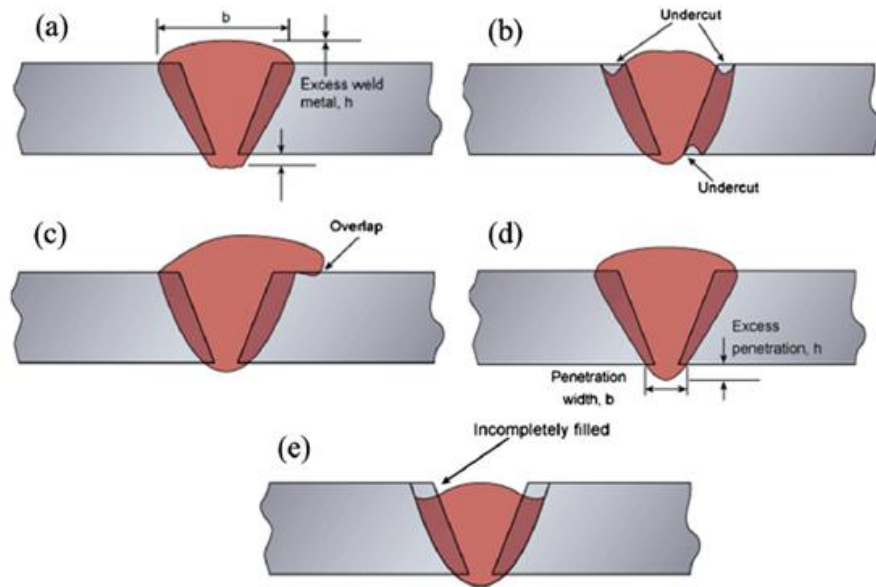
Geometric defects: (a) excess weld metal, (b) undercut, (c) overlap, (d) excessive penetration, (e) incompletely filled groove. [49]
